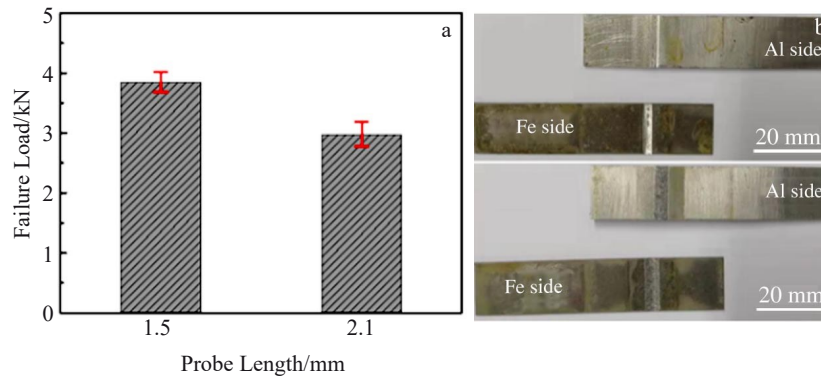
Tensile strength of 6061Al/QP980 steel joints after friction stir lap-welding (a); appearances of fracture locations of 6061Al/QP980 steel joints after friction stir lap-welding with short (b) and long (c) probes
